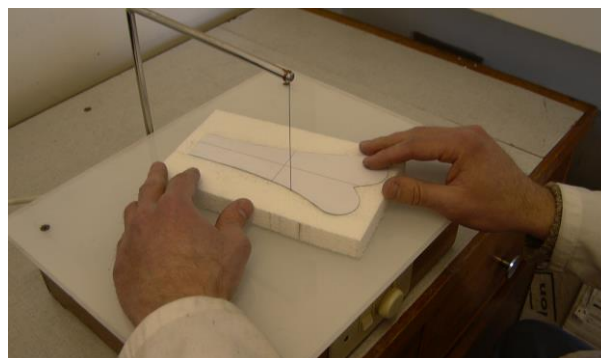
Creating a polystyrene mould-block with a hot-wire cutter [81]
